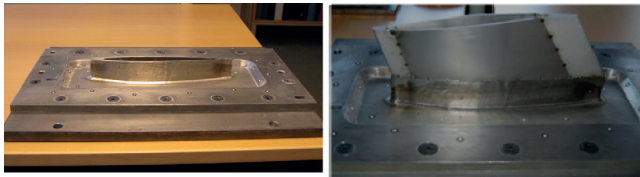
Metal deposited stand up after machining (left) and the sub-component tack welded (right).
